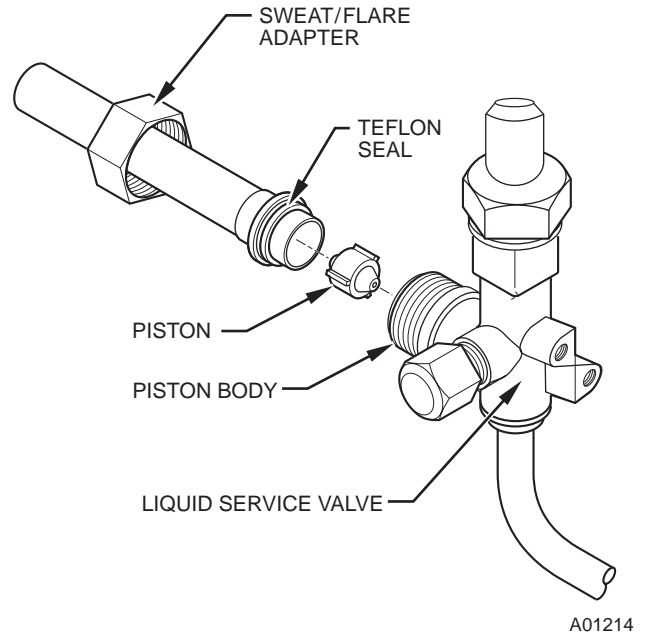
Liquid Service Valve with Sweat Adapter Tube
